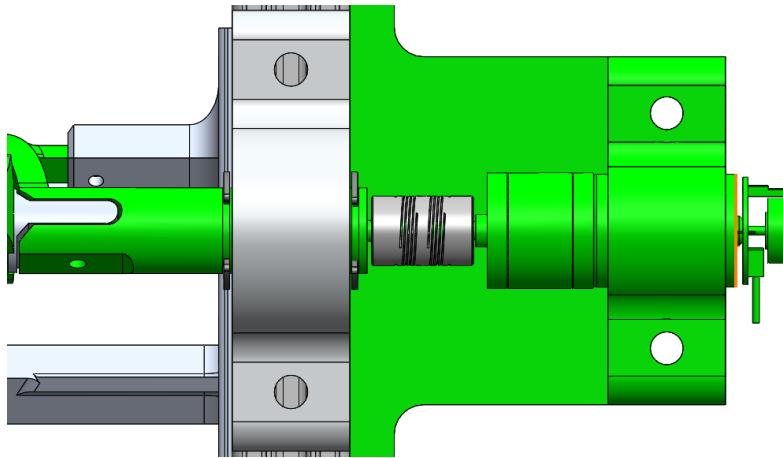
SolidWorks CAD assembly detail. It is possible to notice (from right to left) the actuator, its housing, the shaft coupler, the motor shaft-Wiper connection and the two retaining rings on the both sides of the connection support to the 80 / 20 frames.
